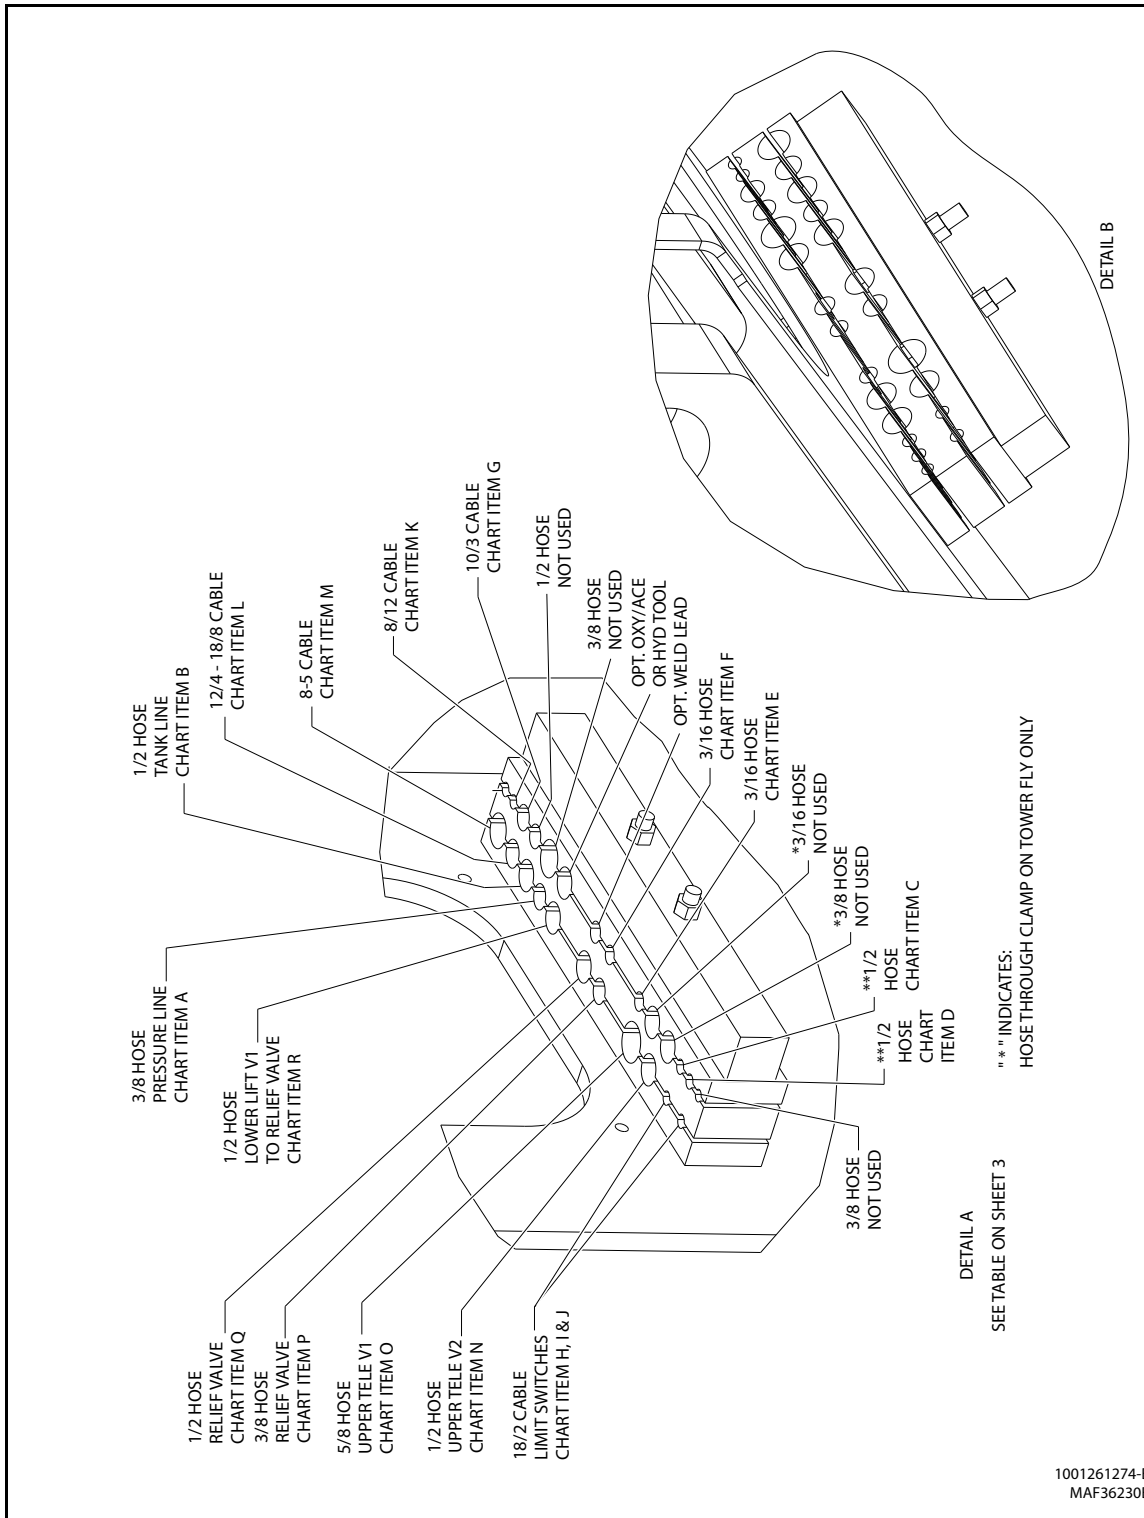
Powertrack Installation Tower Boom - Sheet 2 of 3
